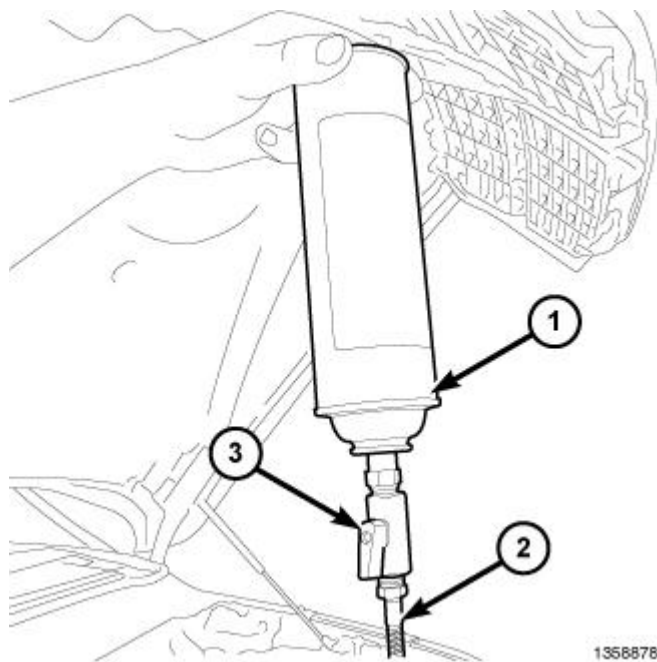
Identifying Turbocharger Cleaner Can, Handle & Hose
